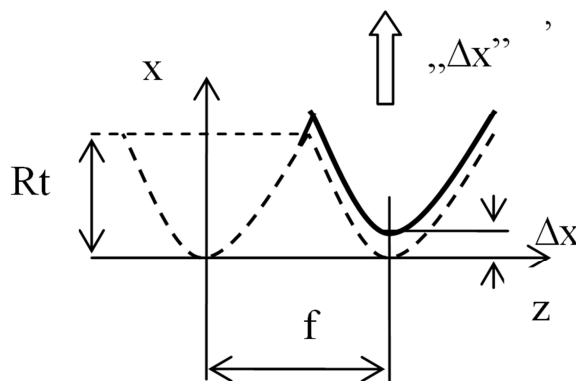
Transversal irregularities with radial displacement of the tool edge outline perpendicularly to workpiece “ $\Delta x$ ”.
